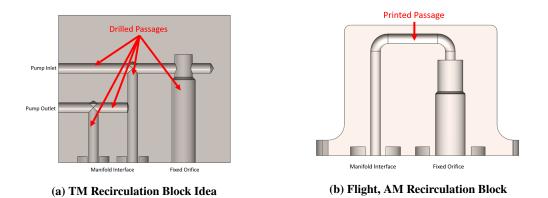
Two recirculation block designs with differing manufacturing techniques
